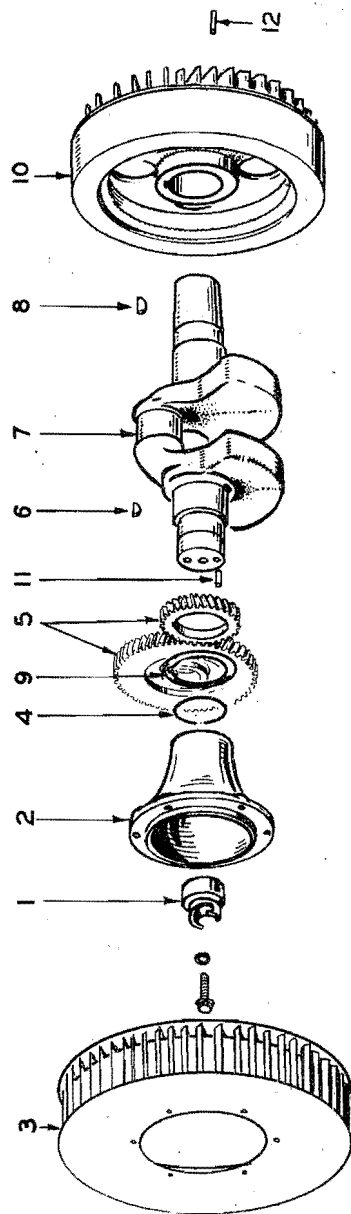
CRANKSHAFT AND FLYWHEEL GROUP
